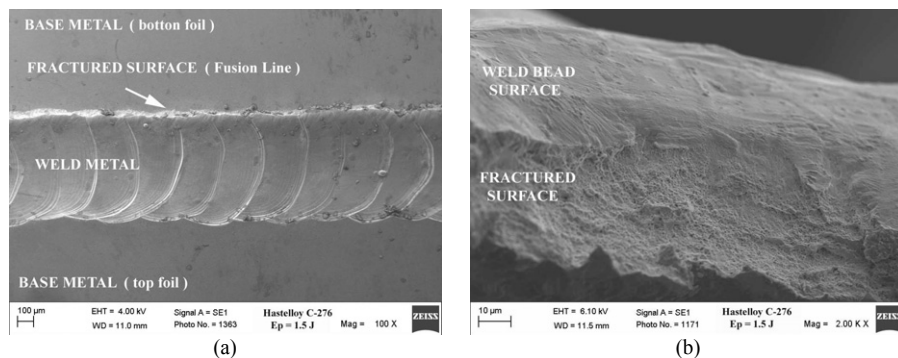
Top view of the joint region fractured (a) and surface fractured; (b) from the tensile shear tests. Hastelloy C-276, 1.5 J
